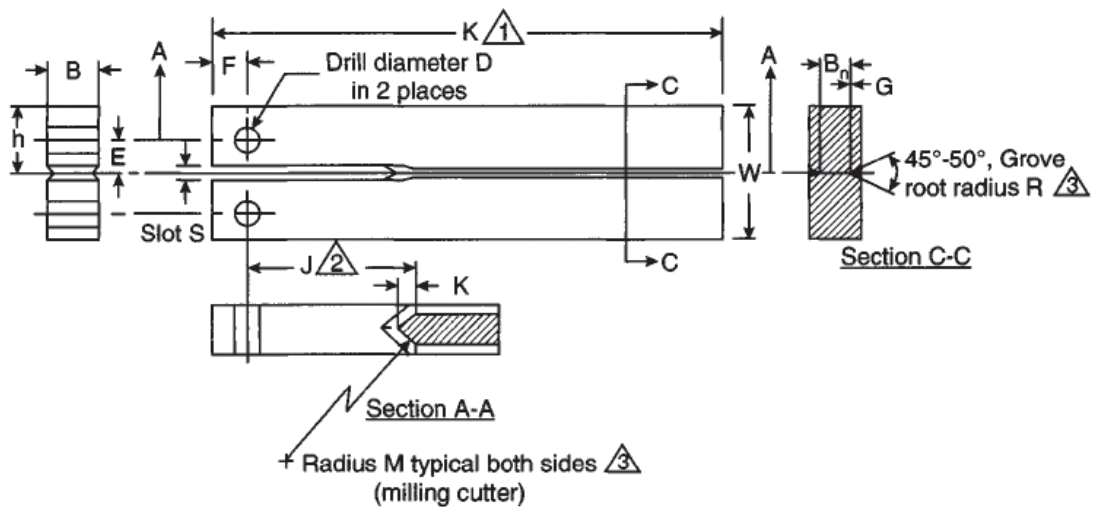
Pre-cracked double beam specimen. Also referred to as double cantilever beam (DCB) specimen<sup>60</sup>
